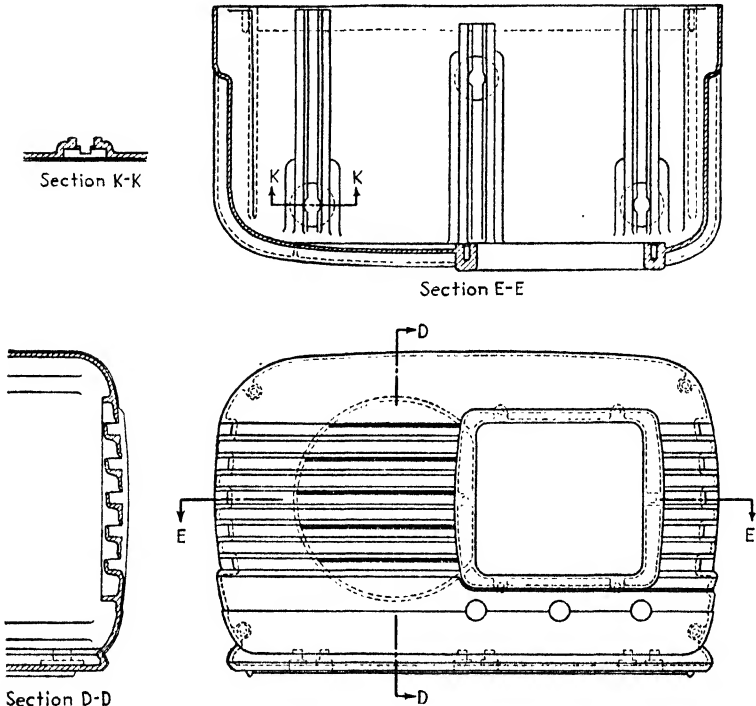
Drawing of radio cabinet (also shown in Fig. 11) having an undercut on the outside of the base that could be formed in a three-way press or by using a loose piece in the mold to form the bottom recesses or undercuts.
